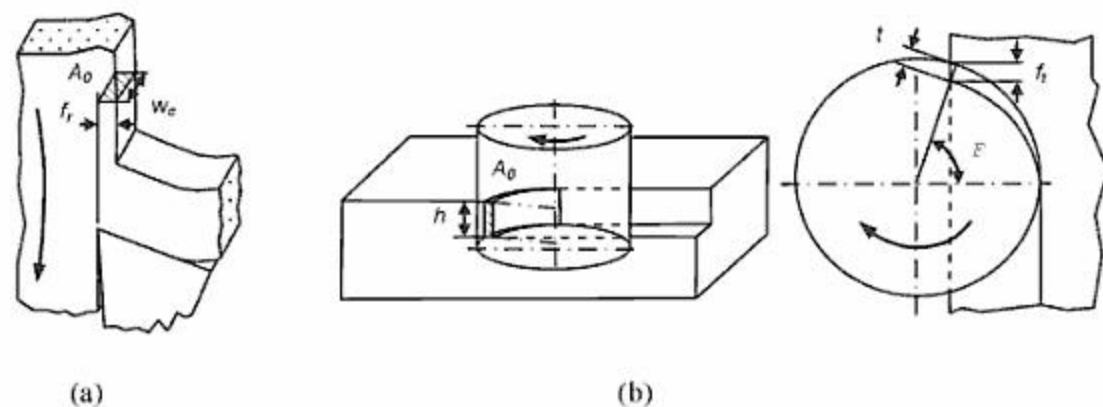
Chip cross-sectional area in machining operations. a. Turning. b. Milling
